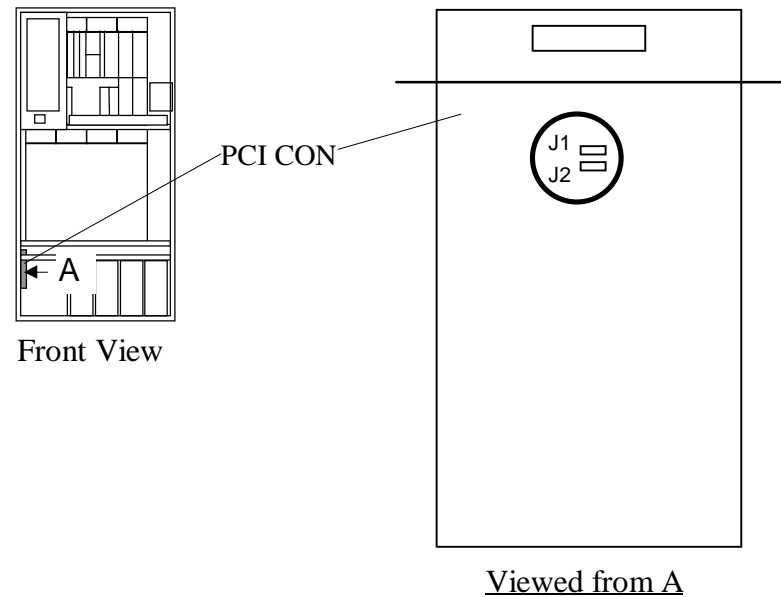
Installation of Jumper Plugs in PCI CON PCB
